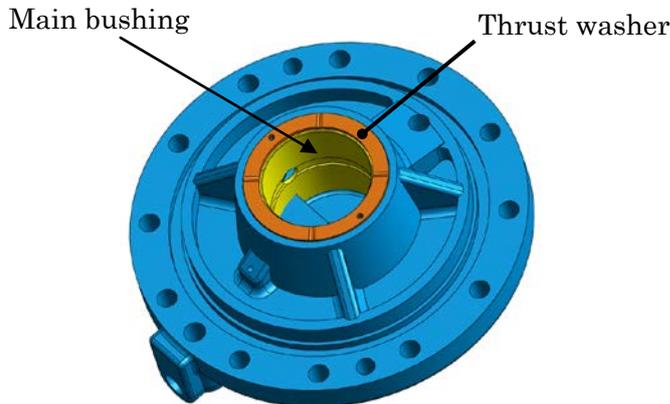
Main Bushing (P/N12) and Thrust Washer (P/N29)
